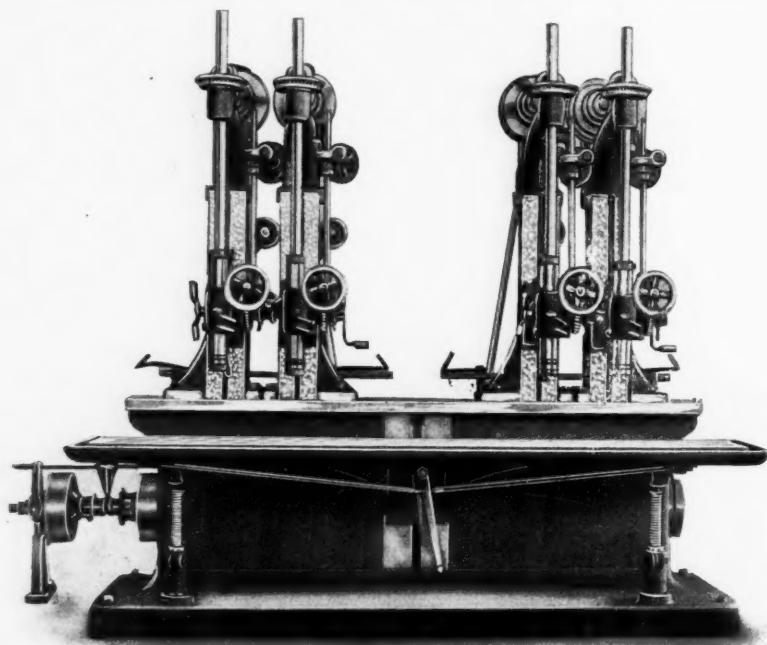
A Four-spindle Gang Drill with Adjustable Columns
